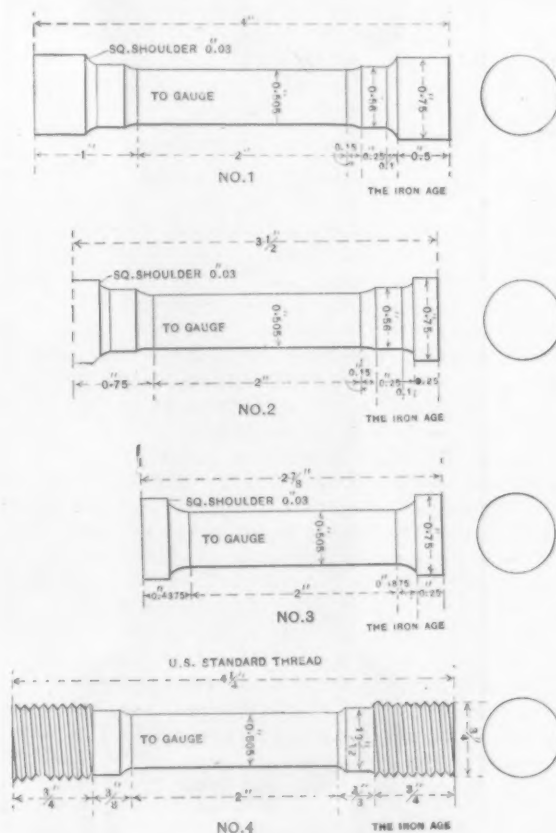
Different Styles of Holding Heads for Specimens Used and the Standard Test Piece.
